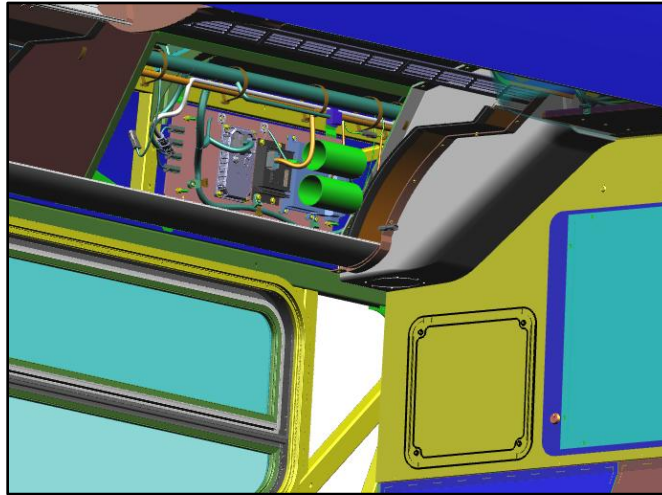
Rear CS Ad Panel and Duct Liner Removed
